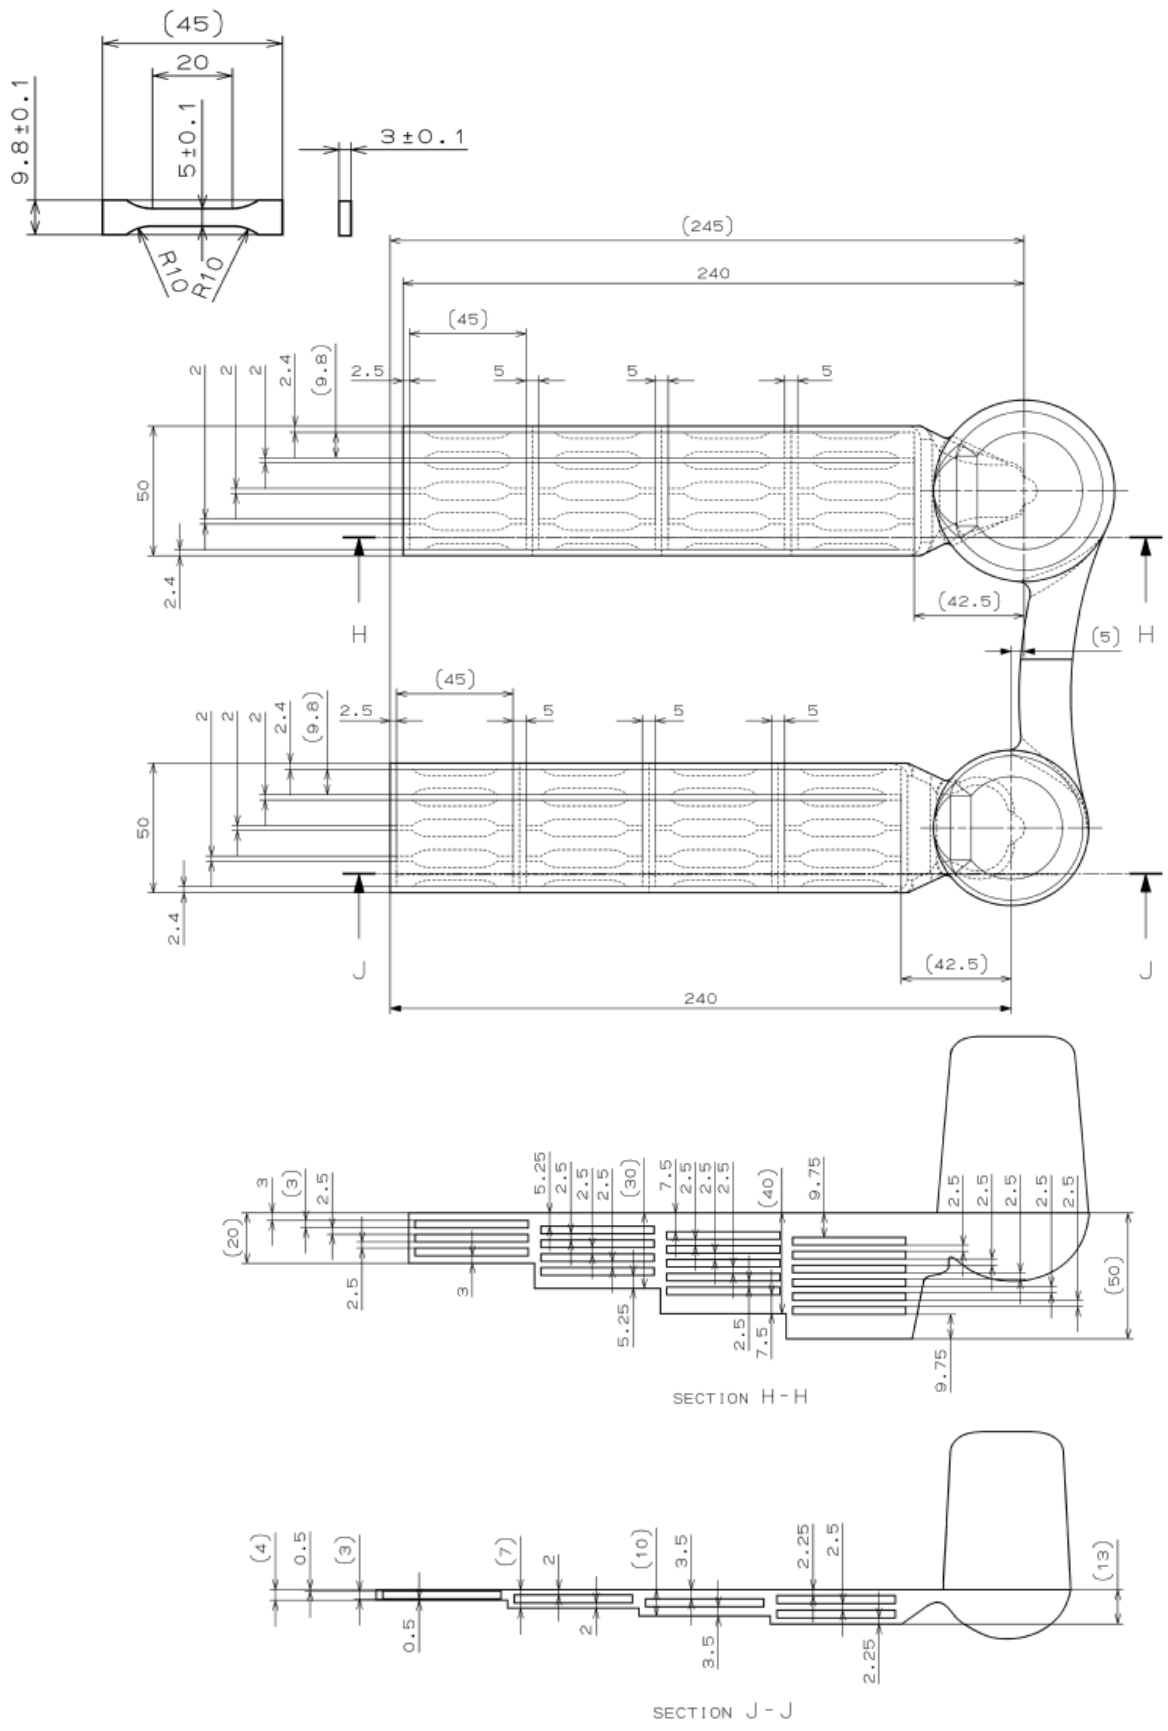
Location of specimens cut from staircase casting test piece.
